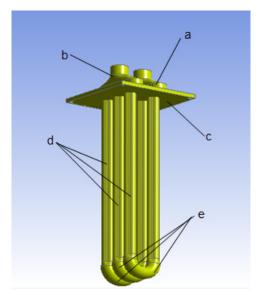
Configuration of B type. a: inlet EGR chamber; b: outlet EGR chamber; c: Clapboard; d: Wave's tube; e: Smooth U type tube
